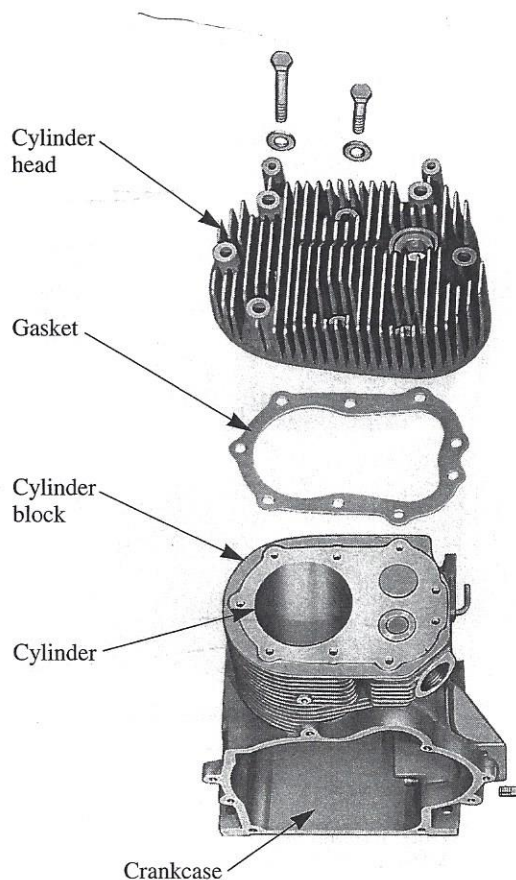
A combined cylinder block and crankcase. Cylinder head and sealing gasket are bolted to cylinder block. (Wisconsin Motor Corp.)
